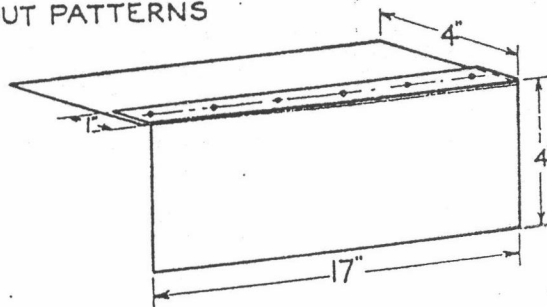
PERSPECTIVE VIEW OF CORNER SEAM
